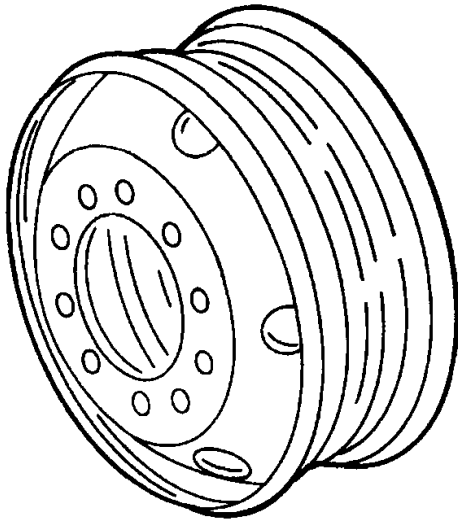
Steel or Aluminum or Aluminum Disc Wheel with Tubeless Tire
